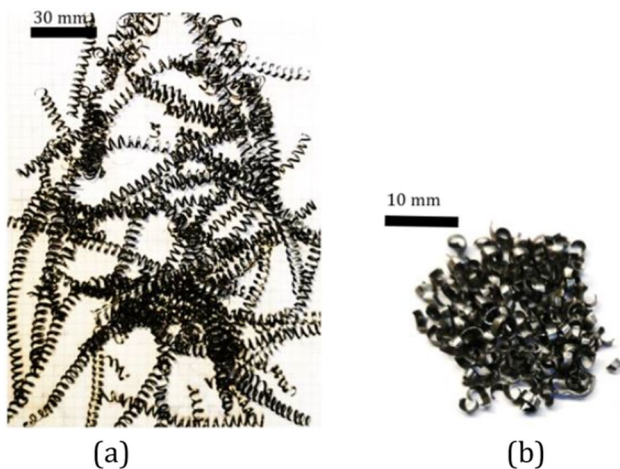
Chips obtained a with conventional lubrication and b with high-pressure assistance (100 bar)
